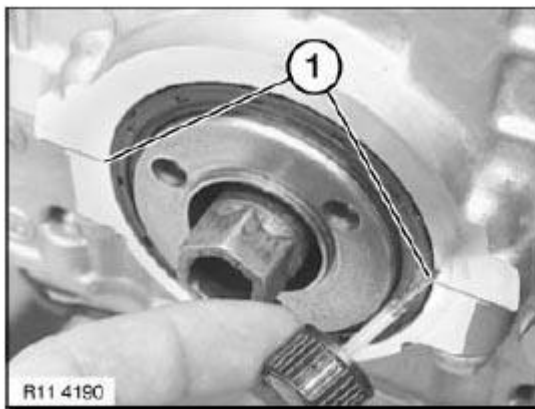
Inserting Brush Into Grooves On Crankshaft Seal
